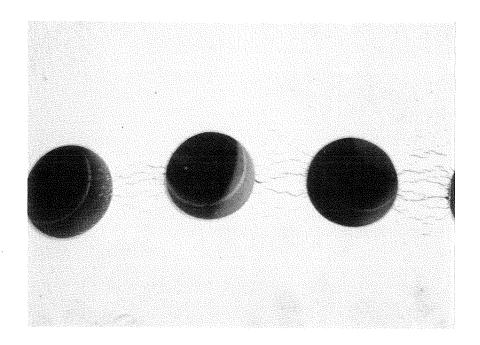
View showing internal cracking in the ligament field of header from corrosion fatigue by thermal stressing.
